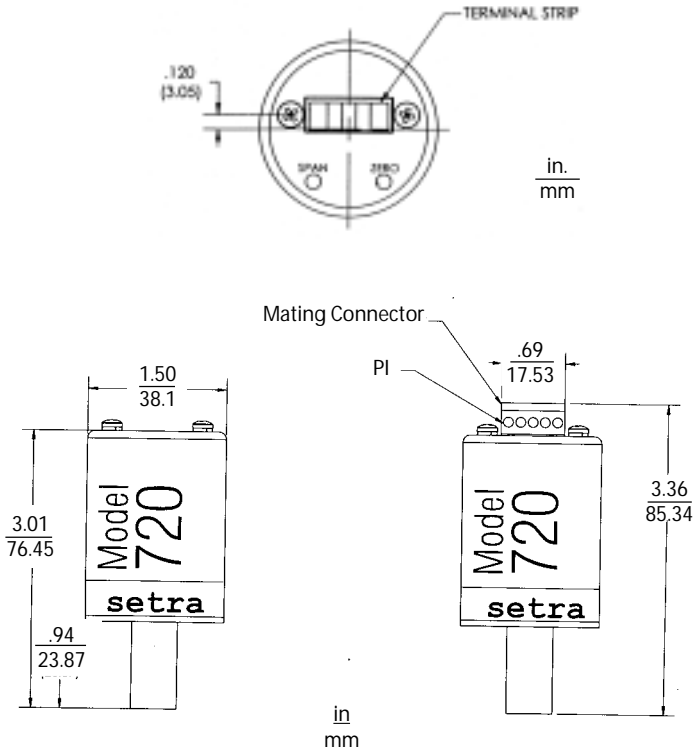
Outline drawing of 5-pin terminal strip, 0.5" OD tube.
